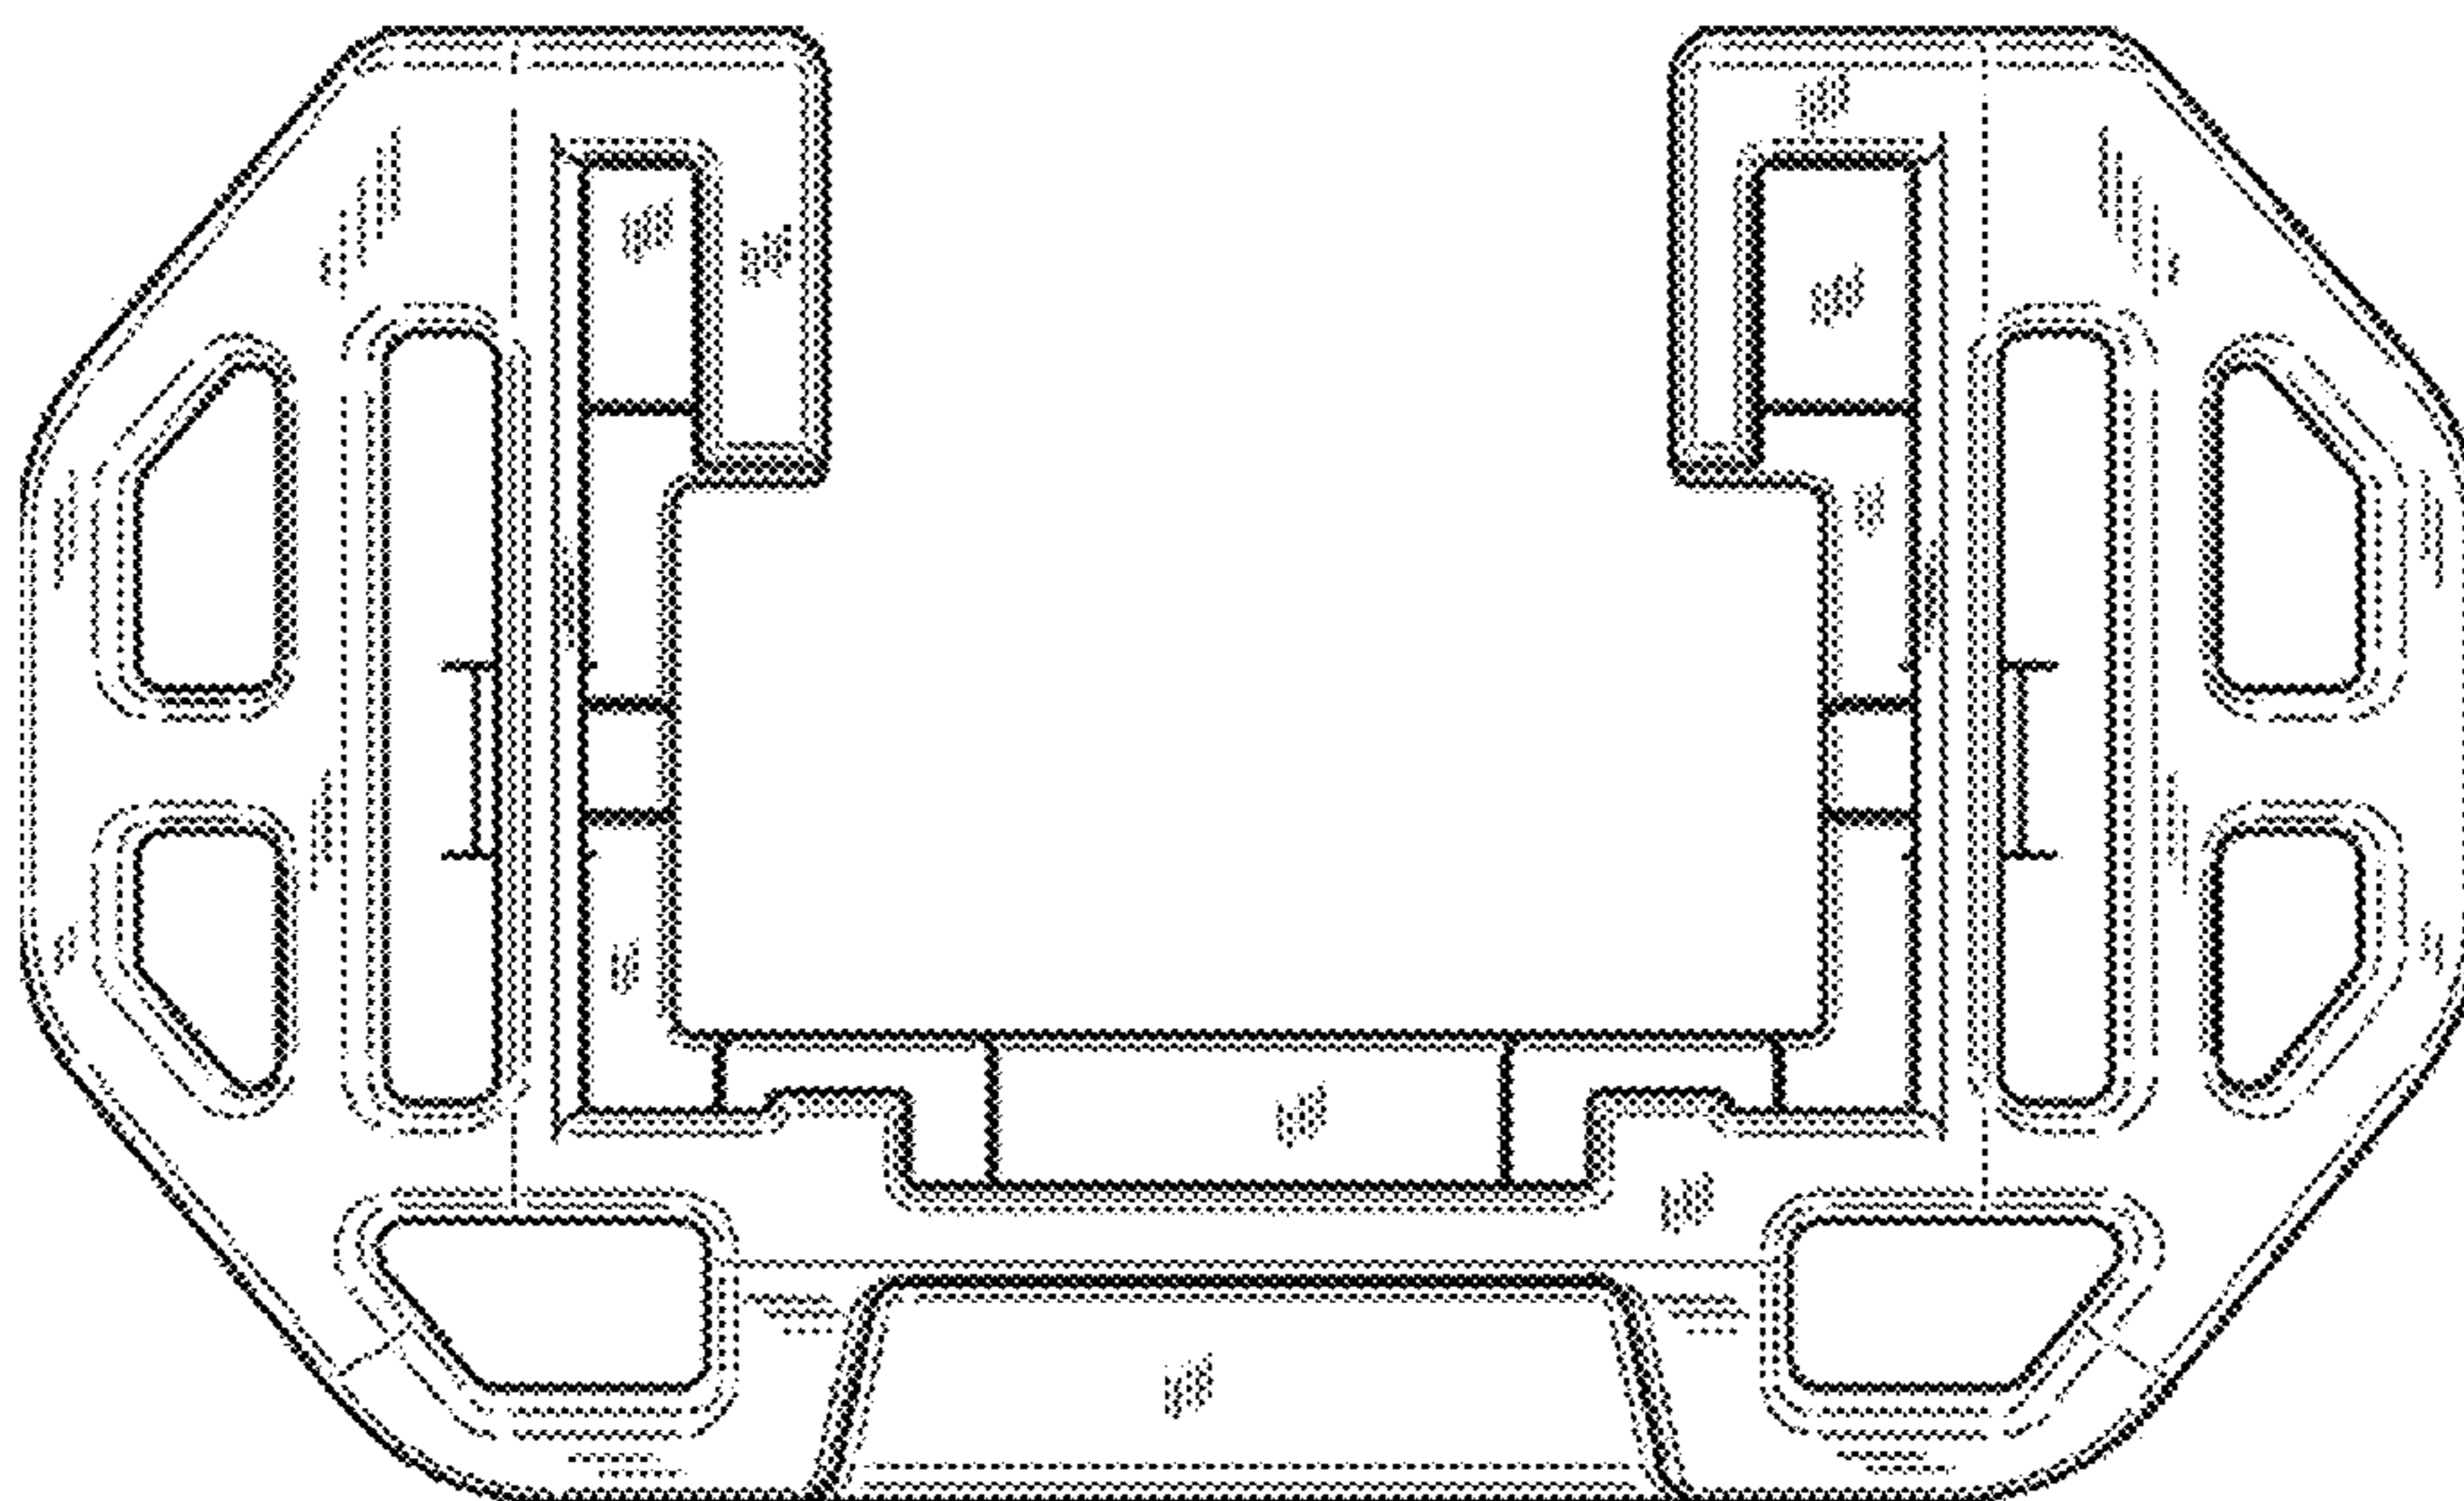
is a top view of the electrical connector cover of FIG. 1.
